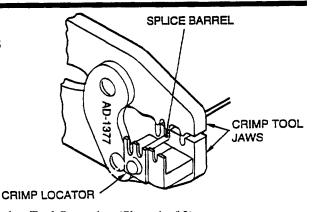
M22520/37-01 Crimping Tool Operation (Sheet 1 of 2)
